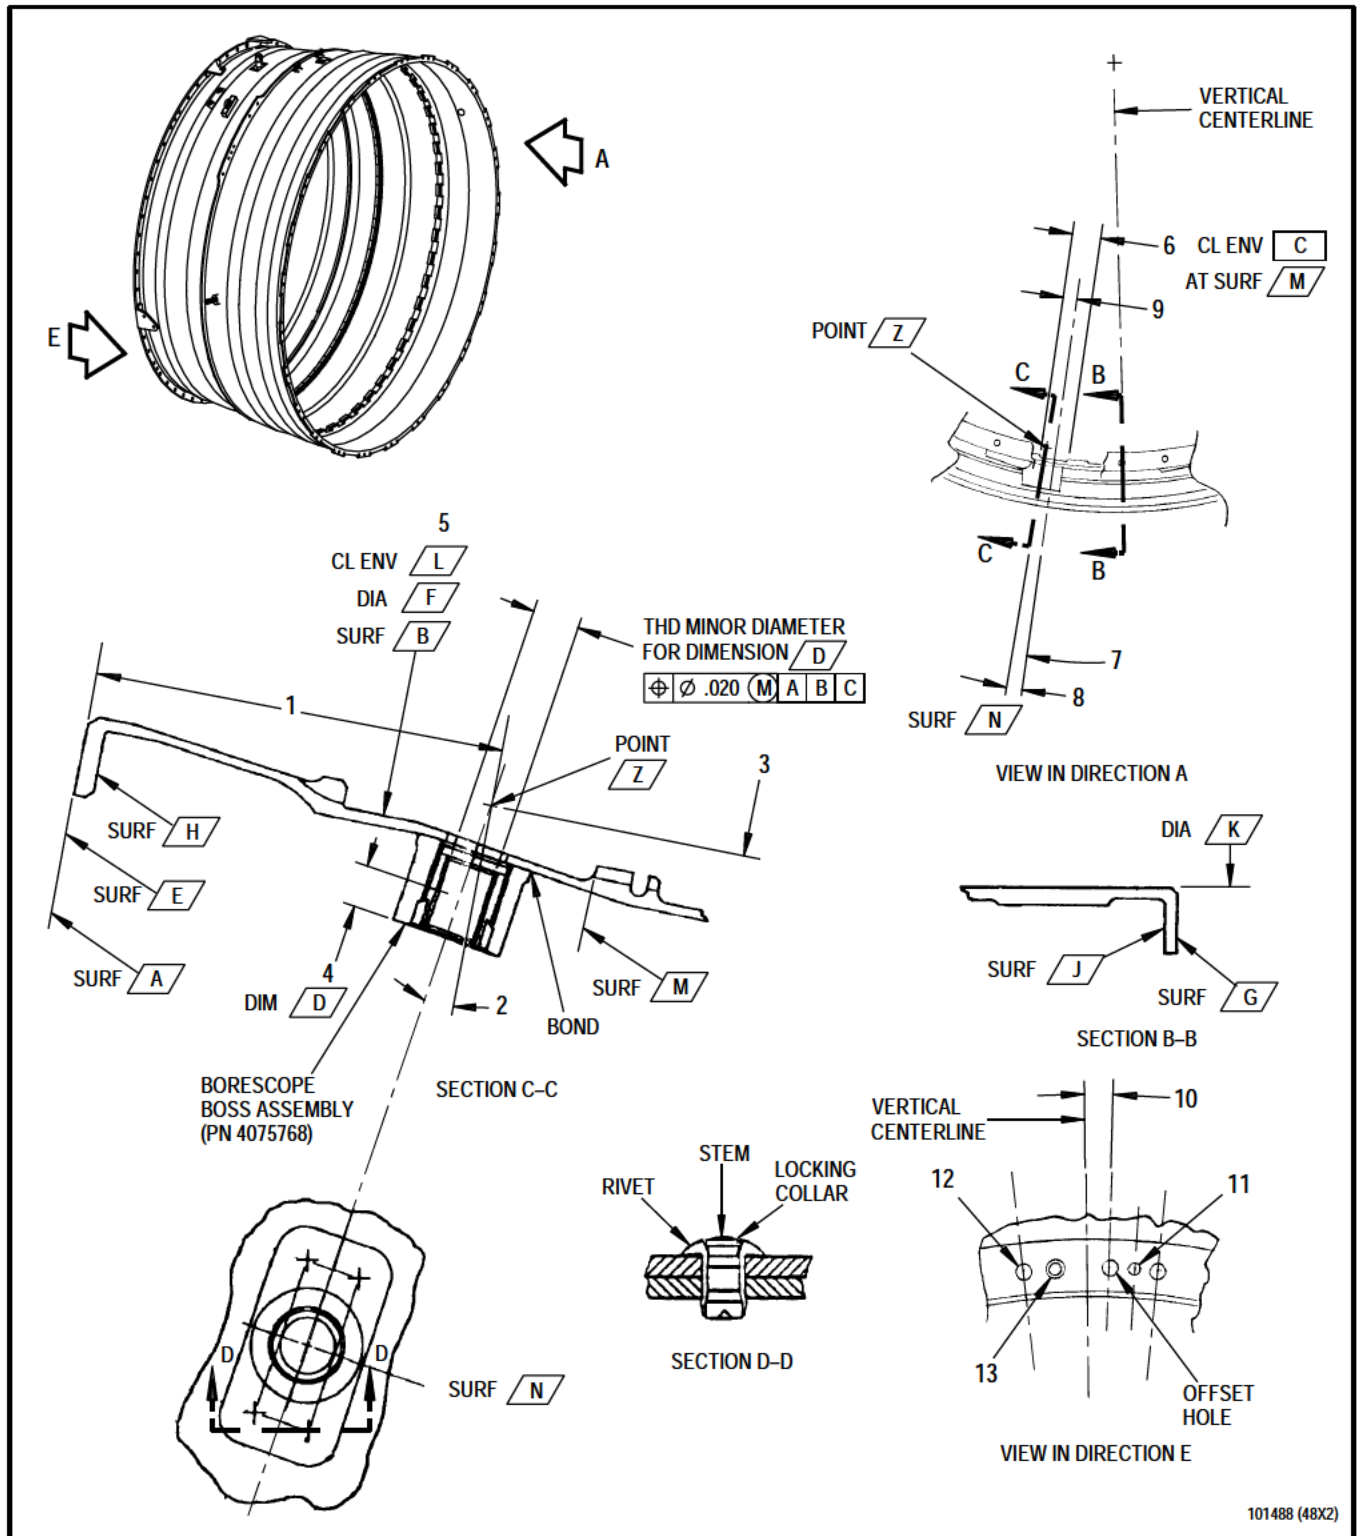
Fan Case Assembly - Borescope Boss Replacement
